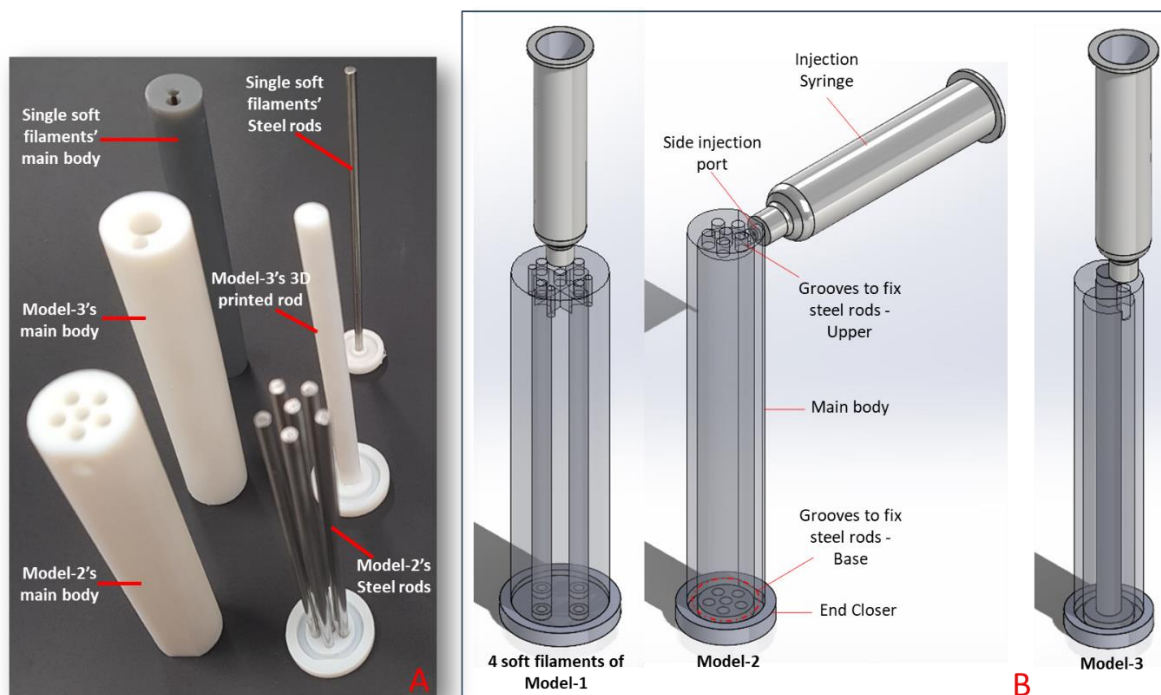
A) real models of the moulds and B) CAD model depicting the moulds designed for the fabrication of four soft filaments of Model-1, the mould of Model-2 with six cavities and the mould of Model-3 featuring a single cavity equivalent in cross-sectional area to six cavities.
